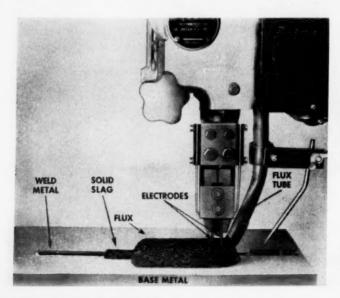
Detail drawing showing setup of type LAF, automatic flux recovery twin-arc welding machine.
